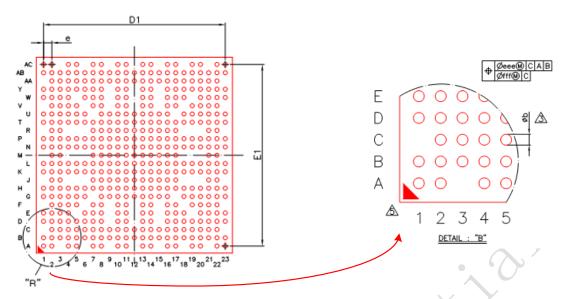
RK3066 TFBGA453 Package Bottom View
